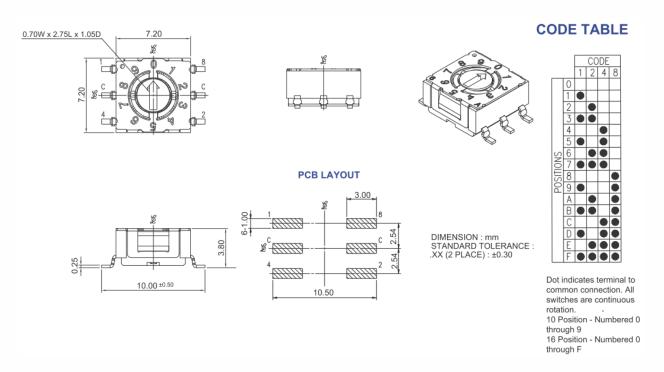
220AD_10, 16 - Standard Through Hole, 10 and 16 Position
